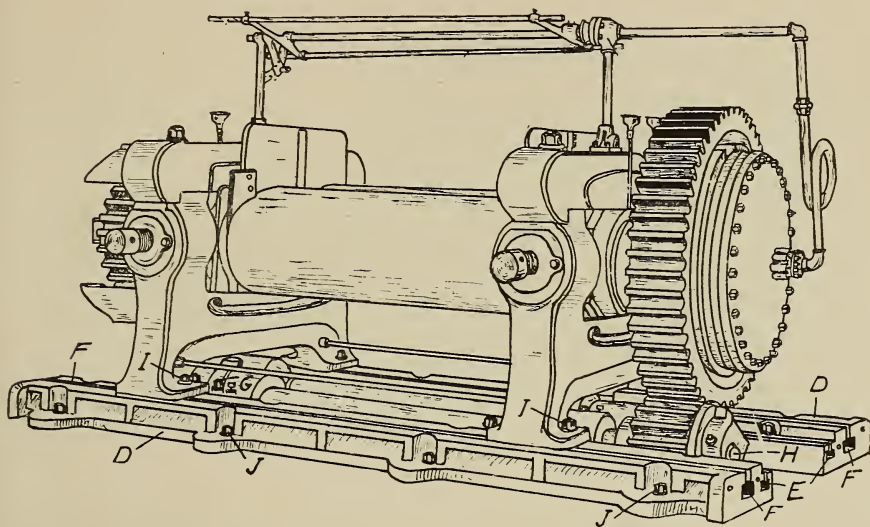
MILL ON CONTINUOUS BED PLATE.
